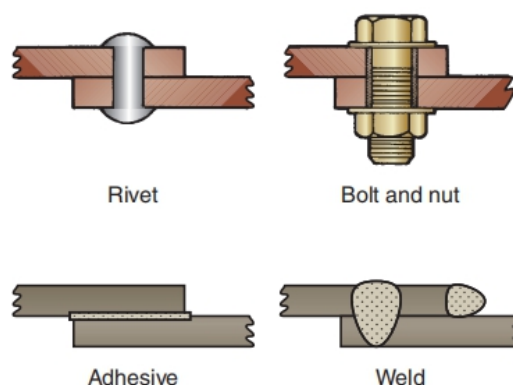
Mechanical joining methods use threaded or non threaded fasteners, which are heavier and less dependable than an adhesive-bonded or welded joint.
